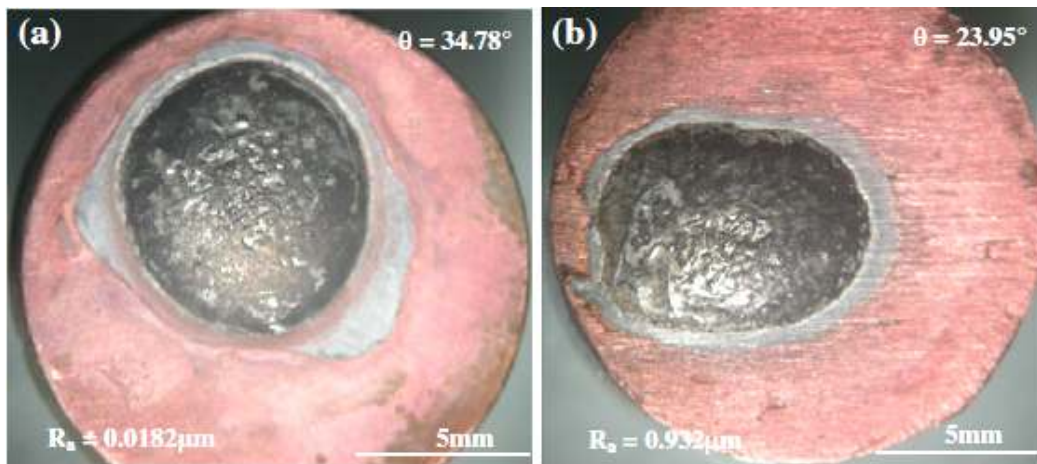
Macroscopic images (top view) of stabilized Sn-0.7Cu solder on (a) smooth Cu substrates (b) rough Cu surface
